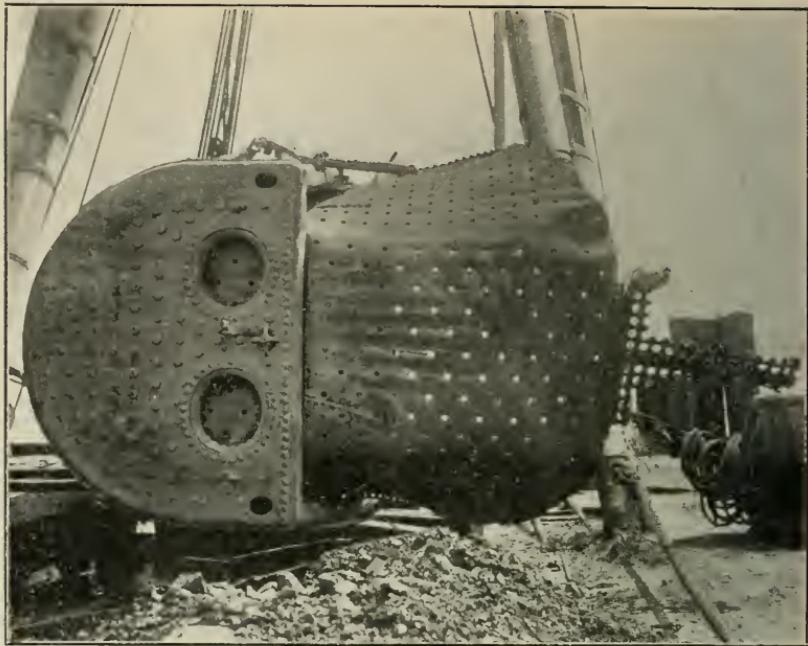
PLATE I.—Front end of exploded boiler of the "City of Trenton," showing crown-sheet with part of tube-sheet attached.
